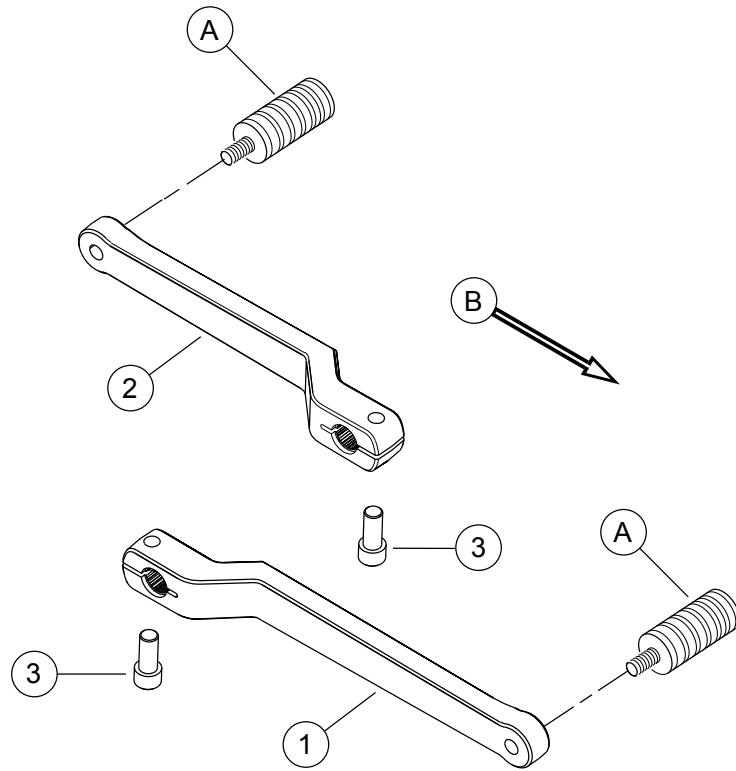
Service Parts: Shift Lever Kit (Generic Shown)
